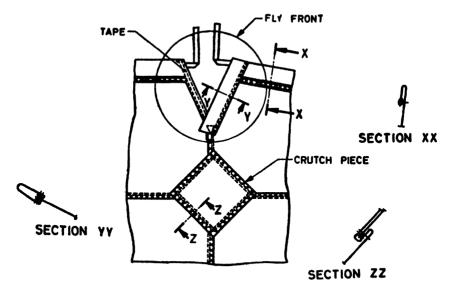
Details of Sewing Fly-Front, Crutch Piece, etc (Inside)
